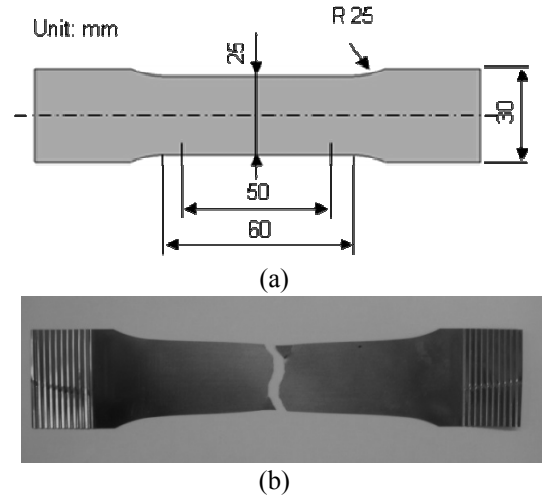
Picture of the; (a) geometry tensile test specimen, (b) fractured specimen after tensile test
